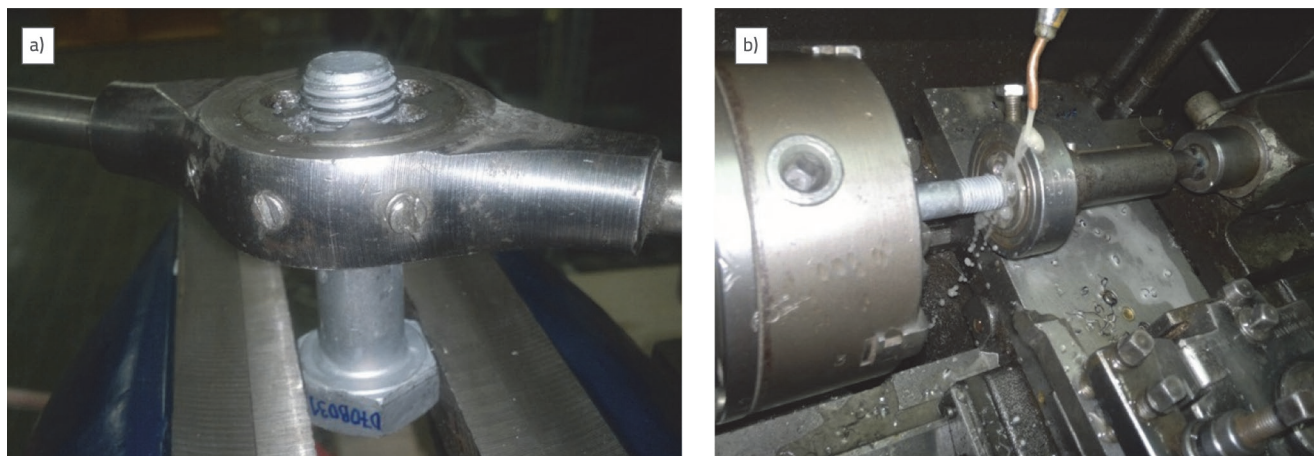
Removal of zinc from bolt thread: a) Removal of zinc by die; b) Removal of zinc by lathe machine
